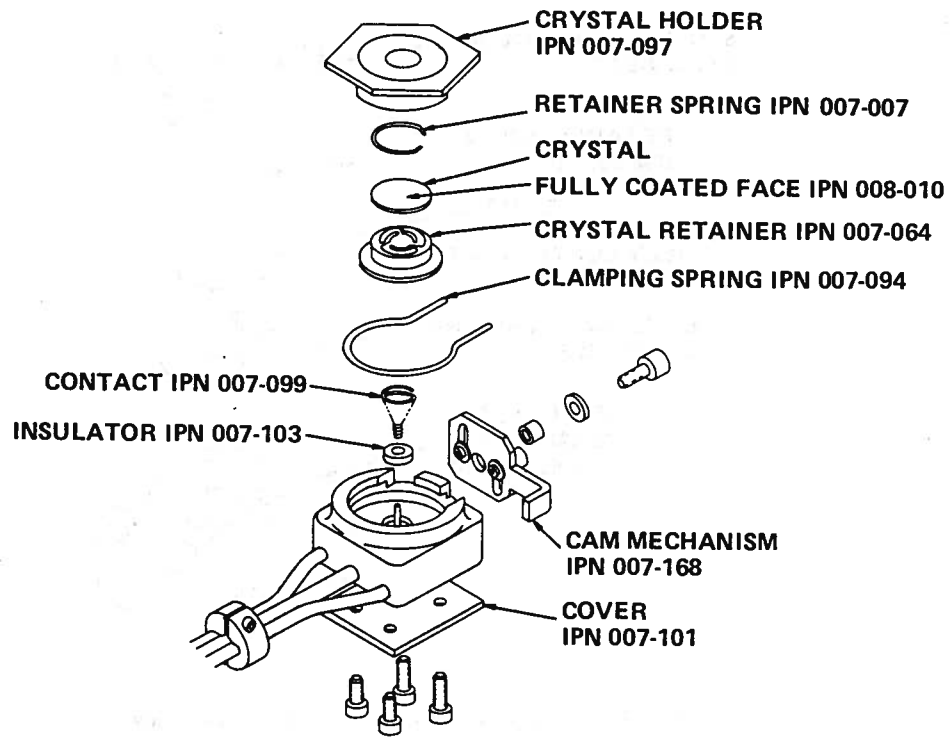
Bakeable Crystal Sensor (Exploded View)
